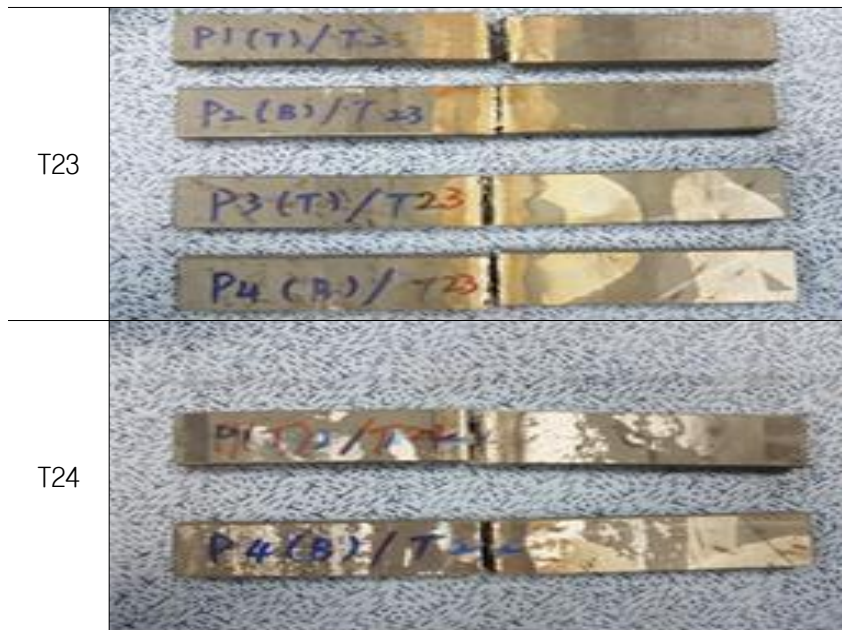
Fracture bend test samples at different welding conditions of T23 and T24
